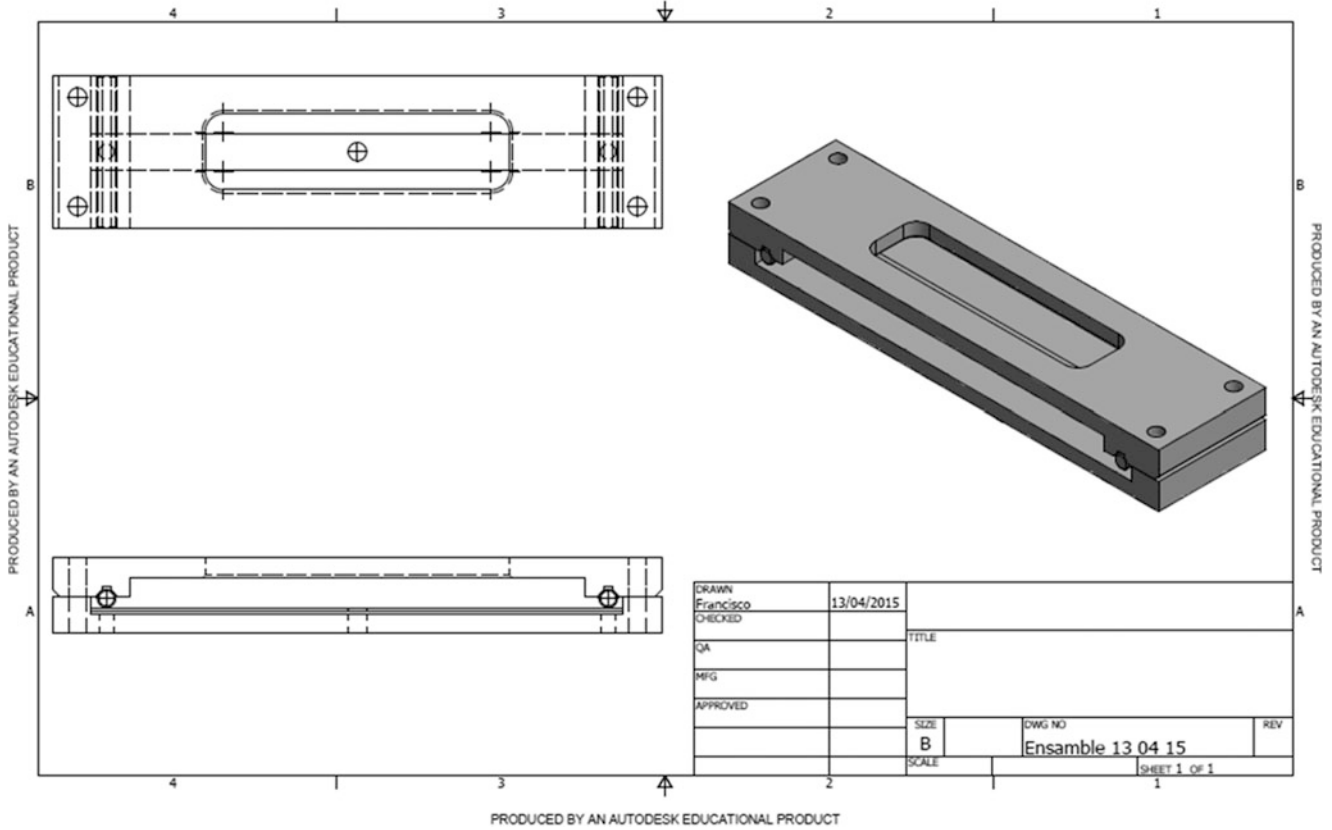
Isometric view of the mount where optical sensors will be placed for measurement
